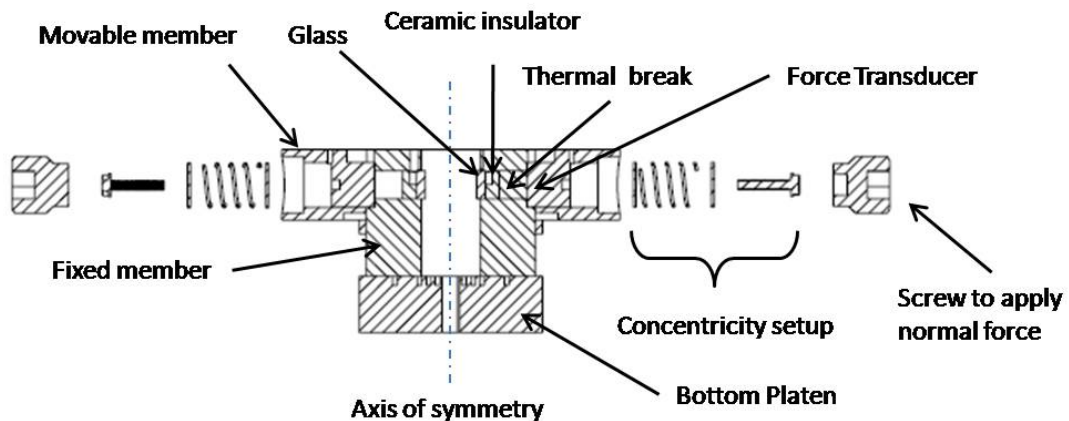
Cross-section view of Figure 3-6 showing the assembly of bottom mold
